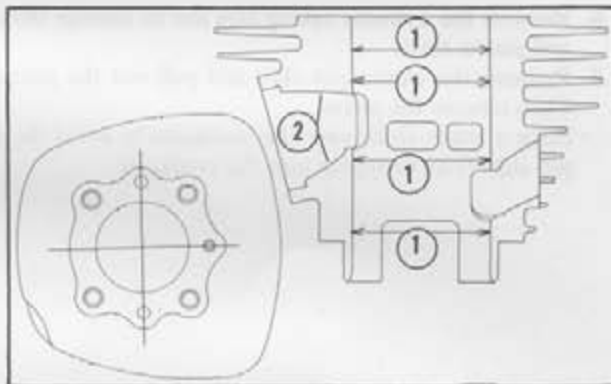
① Carbon deposit in cylinder exhaust port
